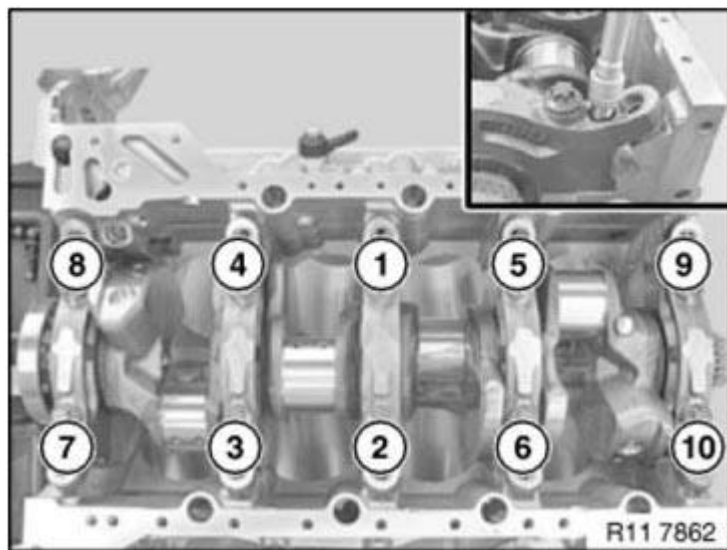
Identifying Collar Bolts (M8) Tightening Sequence
